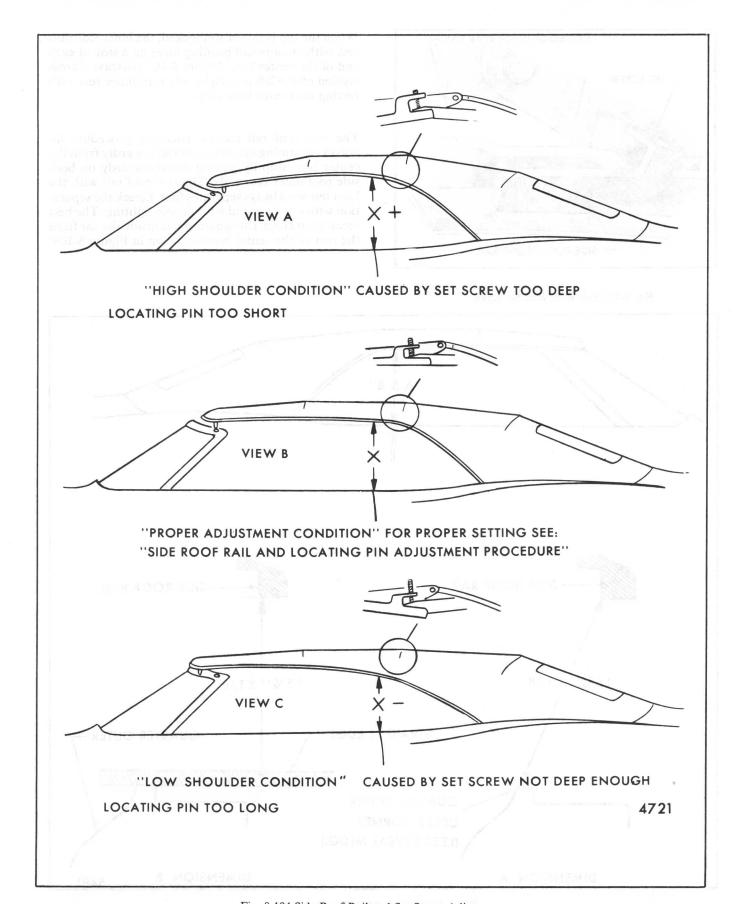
Side Roof Rail and Set Screw Adjustment
